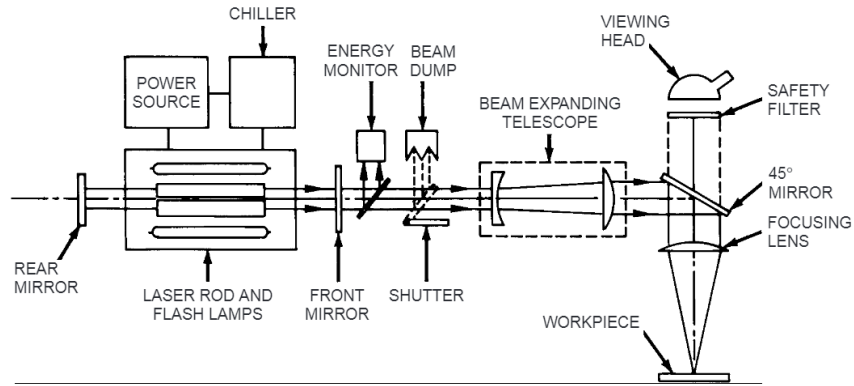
Nd: YAG laser welding apparatus [17]
